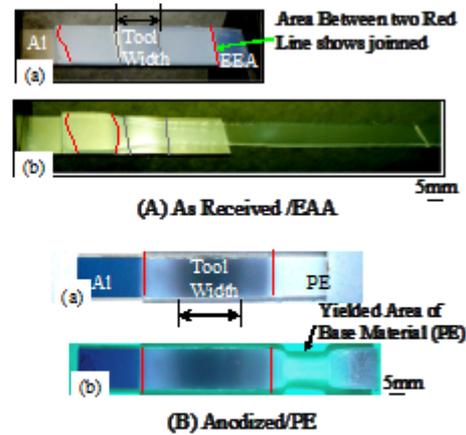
Surface View of Joint (a) Before (b) After Tensile Testing
